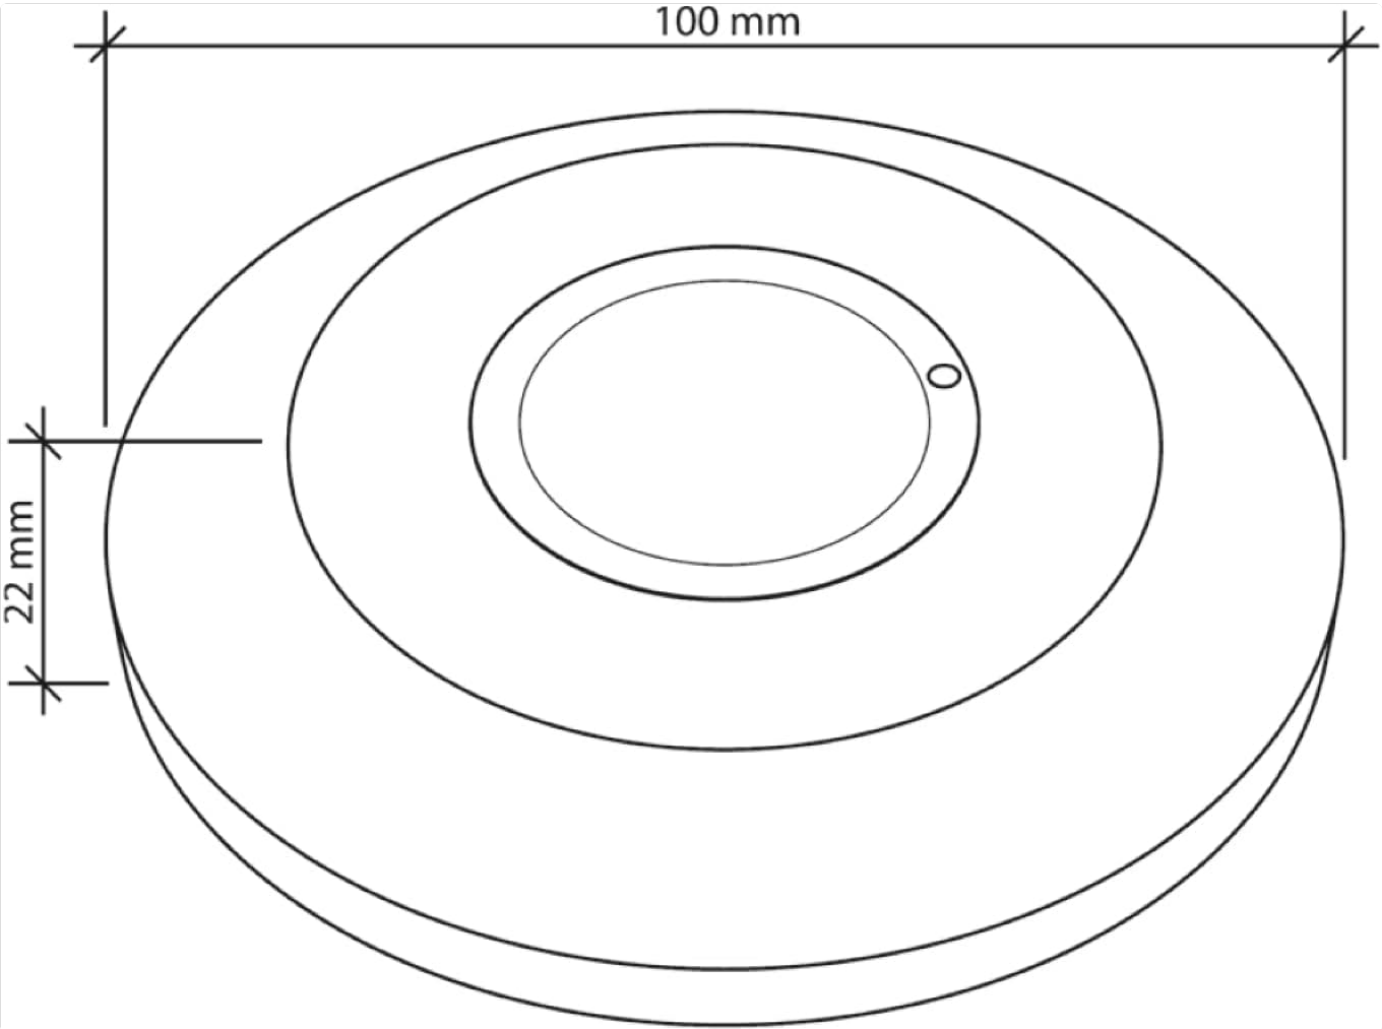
Technical drawing showing the dimensions of the SEBSON HF Motion Detector (100mm diameter, 22mm height).
